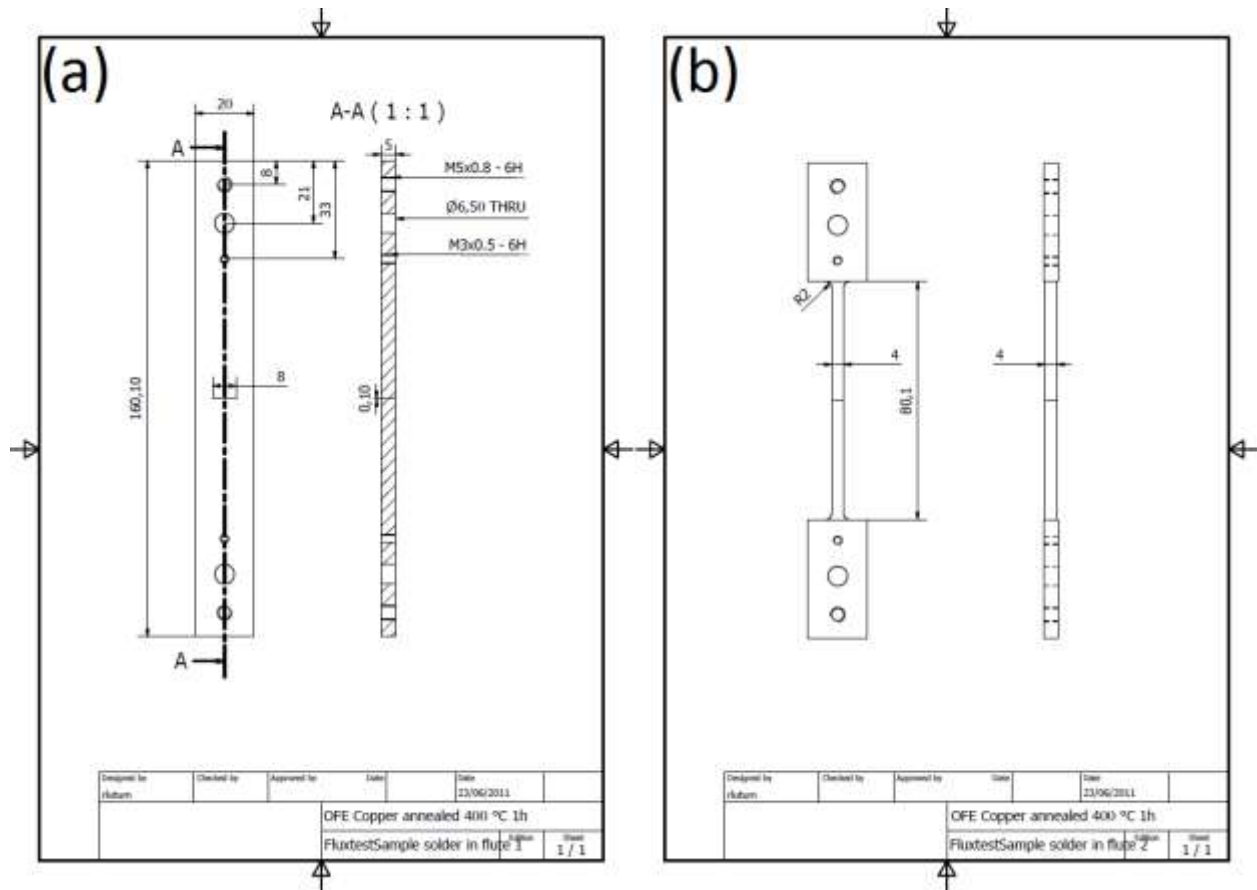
Technical drawings for manufacture of butt-splice samples. (a) Before soldering and milling. (b) After soldering and milling.
